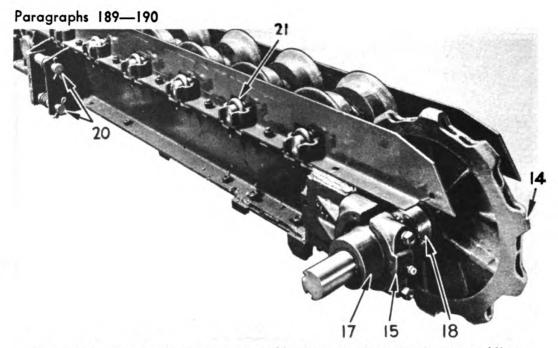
Crawler frame, turned upside down to show tread support idlers.
